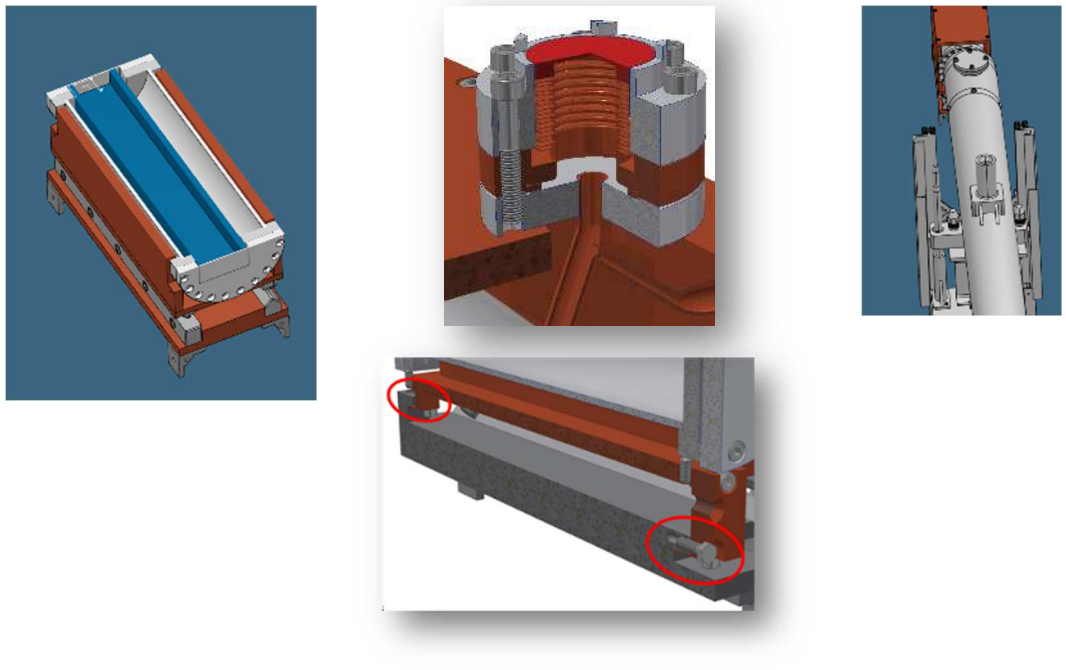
(left): Cut view of the BBG assembly Middle:(top) Pressure Indicator, (bottom) vertical locking with spring plates. (right) Current misalignment of the CSPEC guide with BBG (target).
